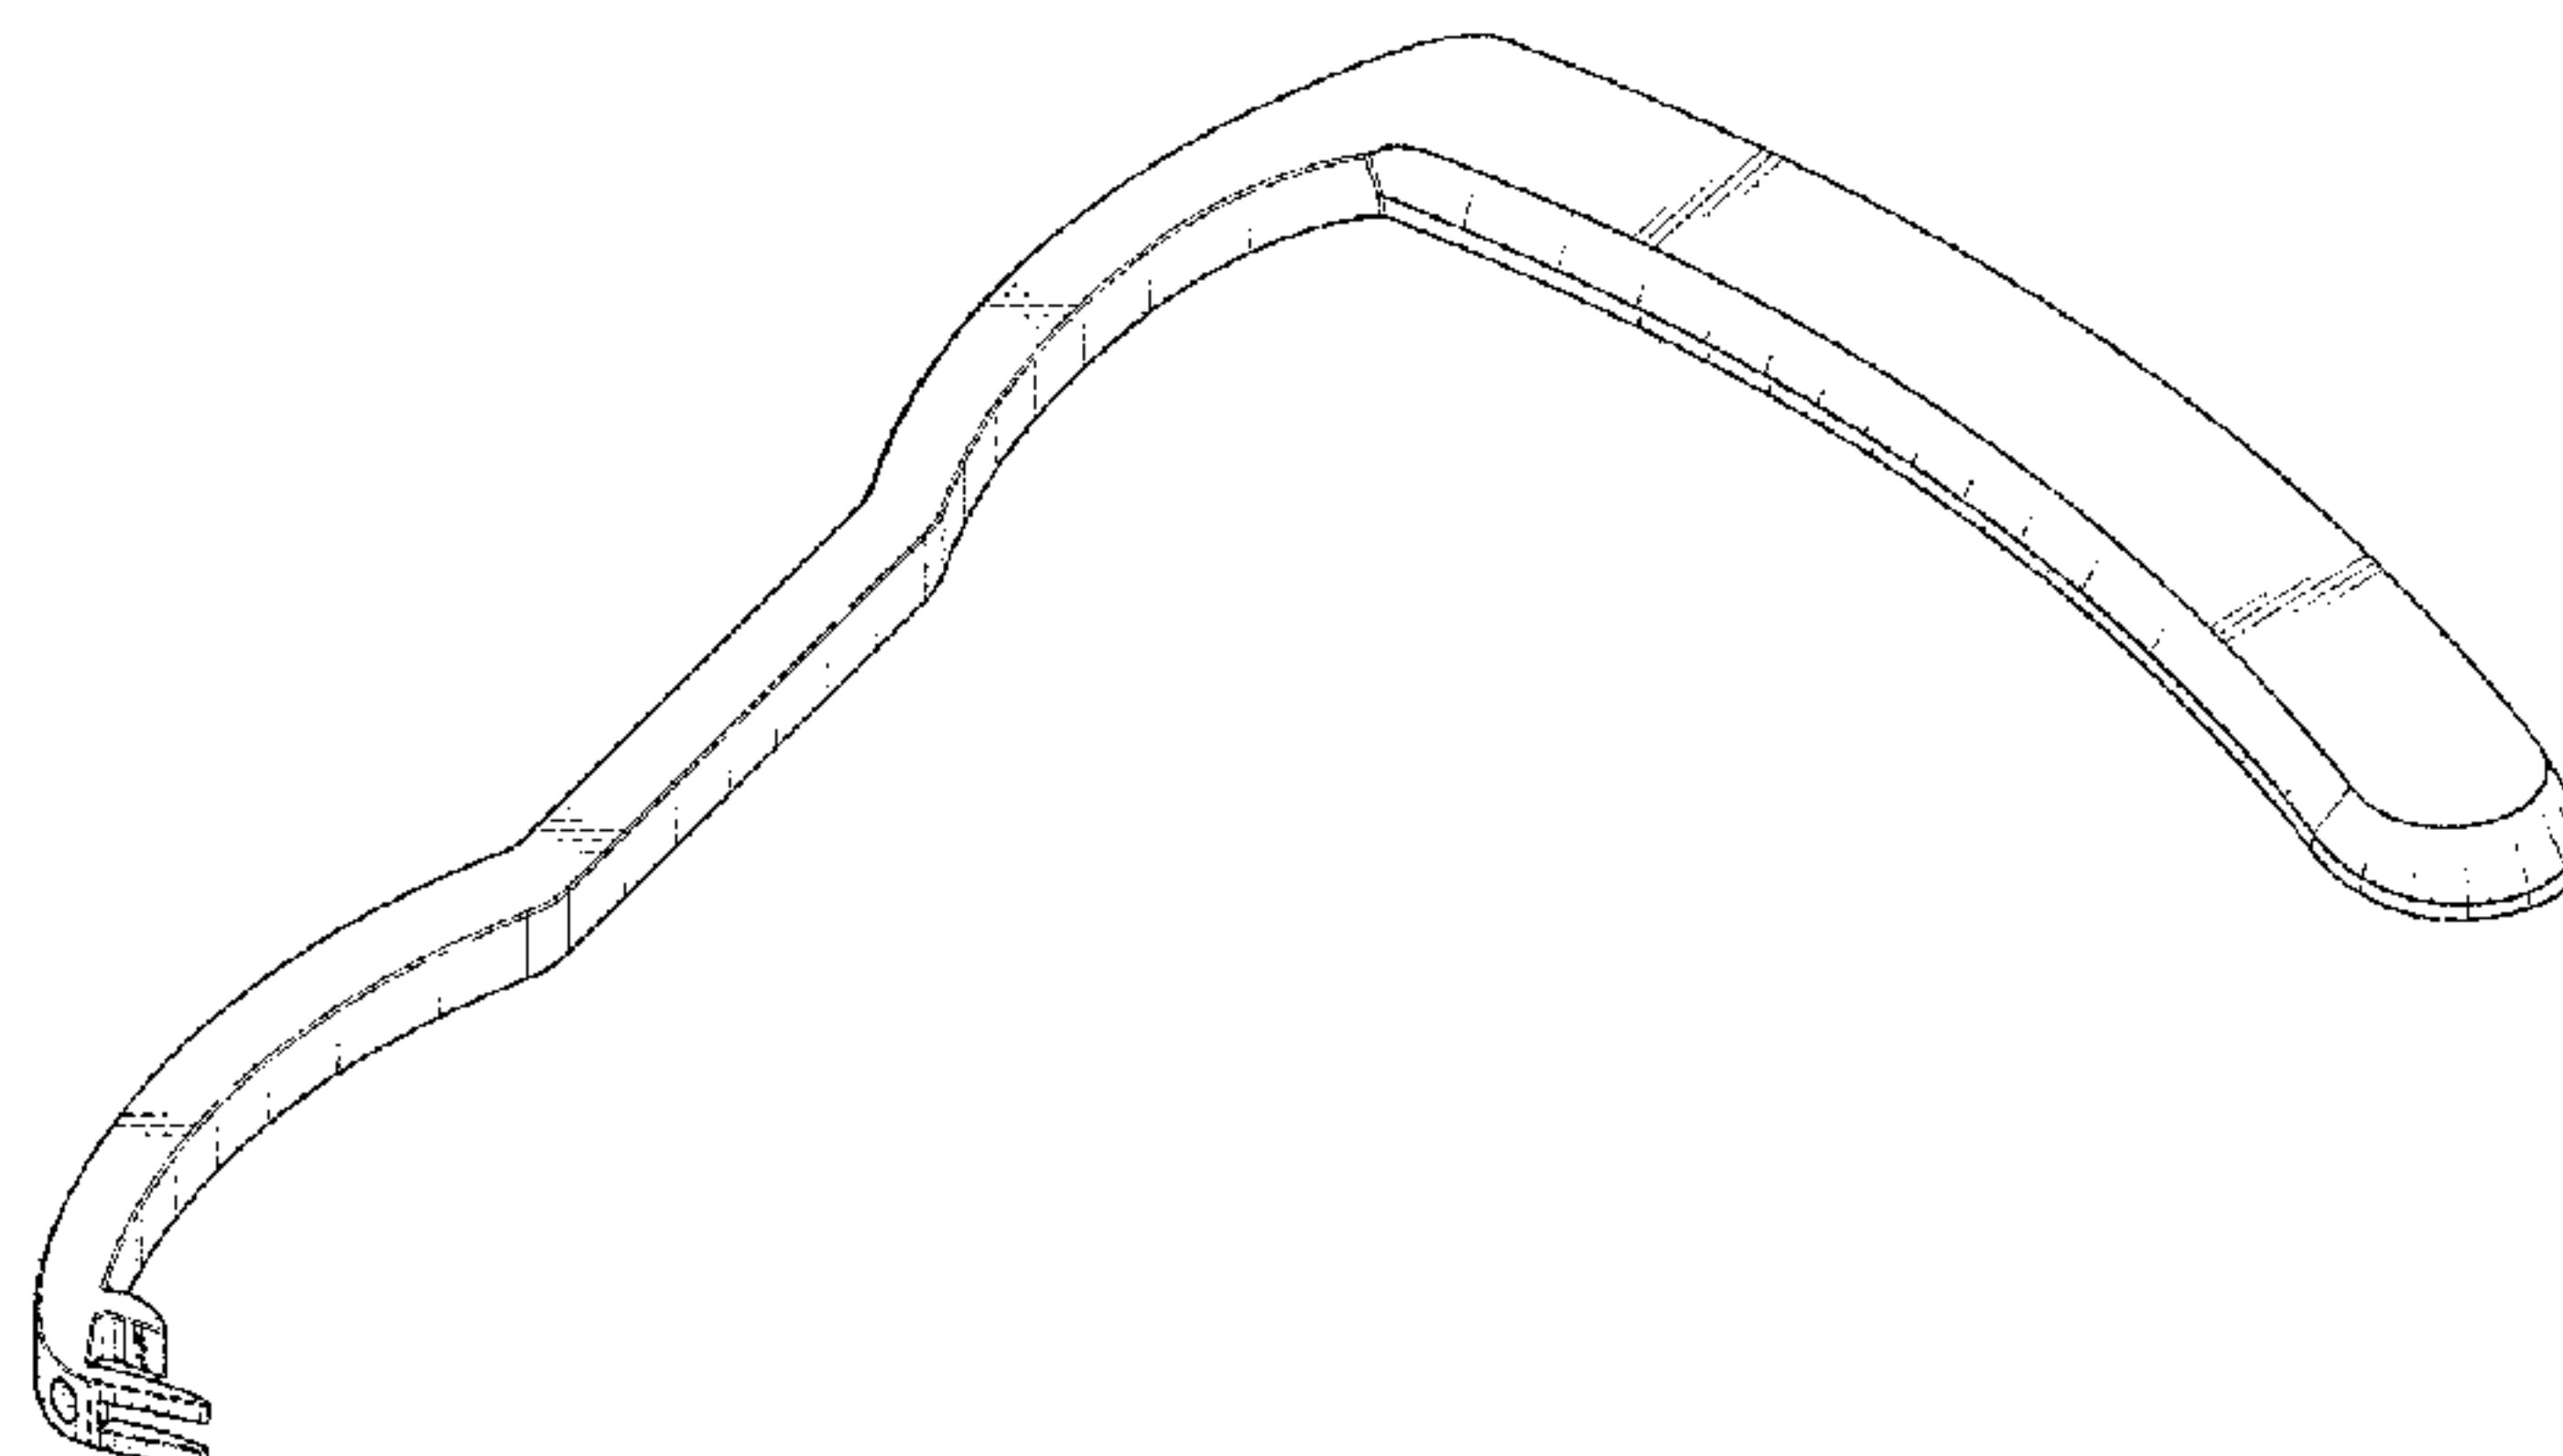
is a right-side elevation view of the arthroscopic jig of FIG. 2;
